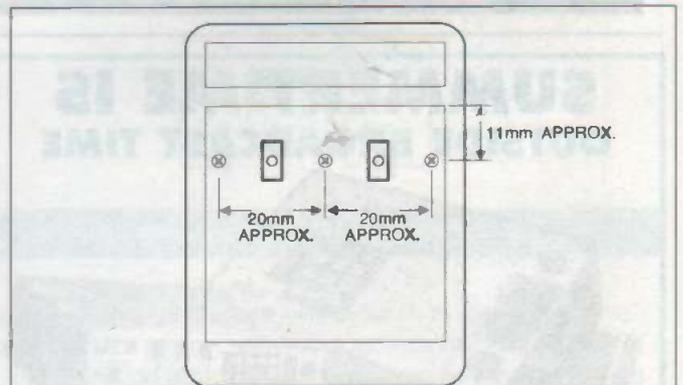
the top of the specified case, showing the position of the microswitches and 6mm bolts screws. See text. The Veroboard fitted inside the lid must clear the taller components on the PCB
